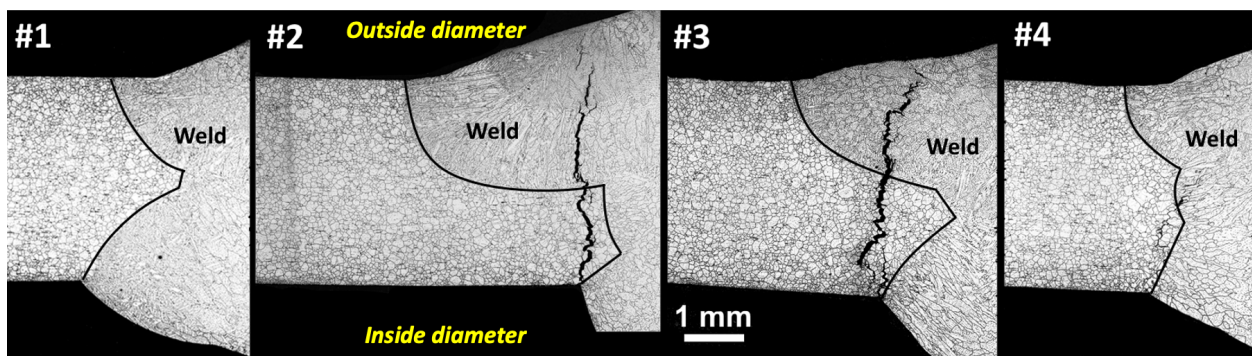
Cross-sectional etched micrographs for one side of a weldment (R14-W25) around the circumference showing crack initiation at the weld toe (#4), crack growth from weld toe through the HAZ and weld (#3 and #2), and no cracking (#1).
